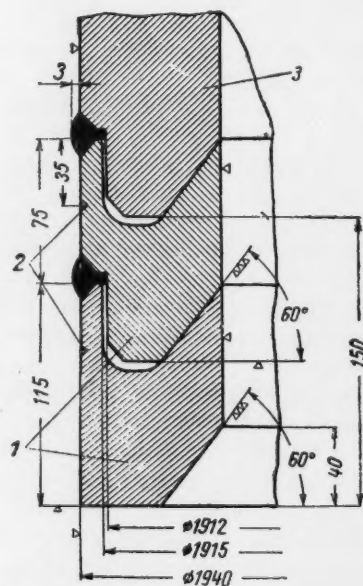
Removable contact surfaces: 1) rings; 2) guide marks; 3) bottom part of hopper of distributor.
